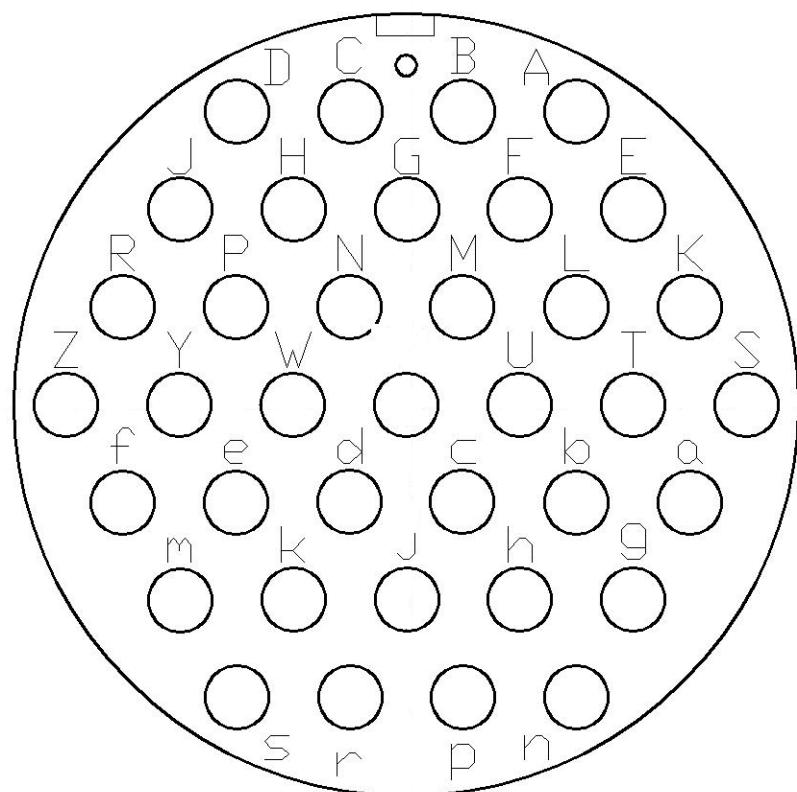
Inverter Box CN5 Connector Layout Drawing
